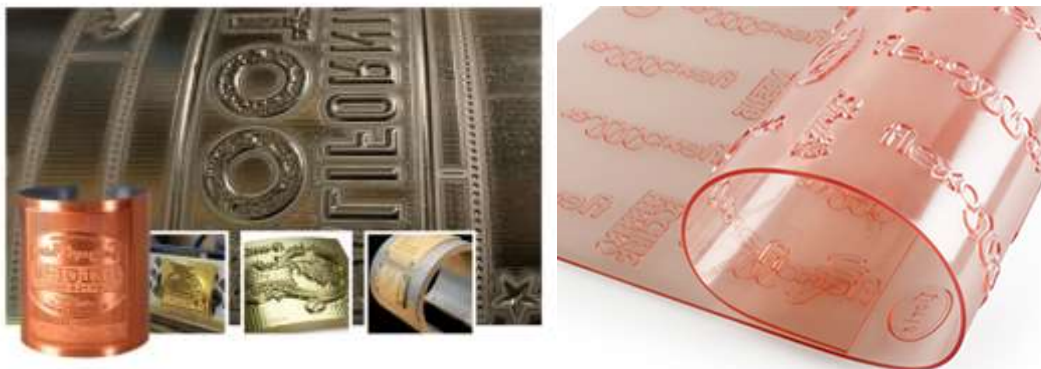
Embossing Dies and Rollers, Figure 13: Flexography Printing Plate
